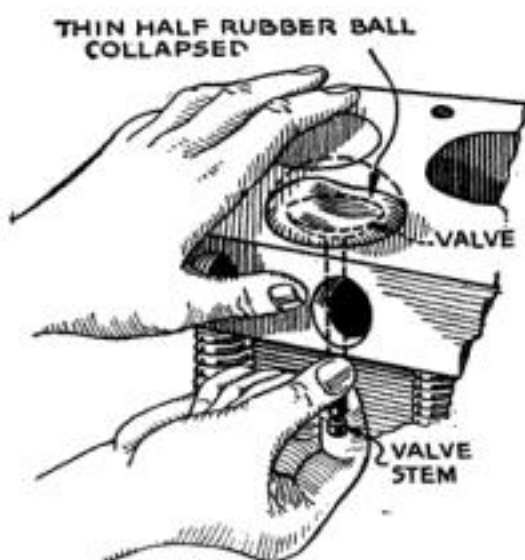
Ordinary thin rubber ball can be used as satisfactory engine valve tester.
